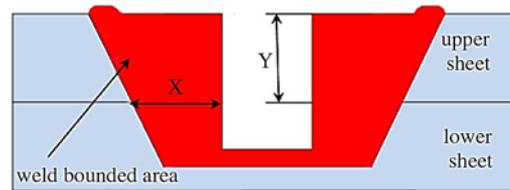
Schematic illustration of the weld zone of a friction stir spot welding joint [14].
